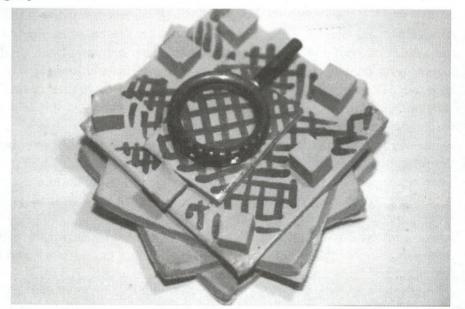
Example of the mold used by POMELLATO for producing jewelry pieces with many setting posts: assembling the mold
